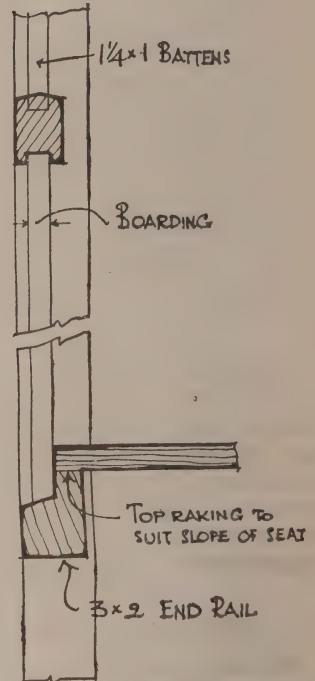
Detail Section of Corner of Hooded Seat at E (Fig. 91)
